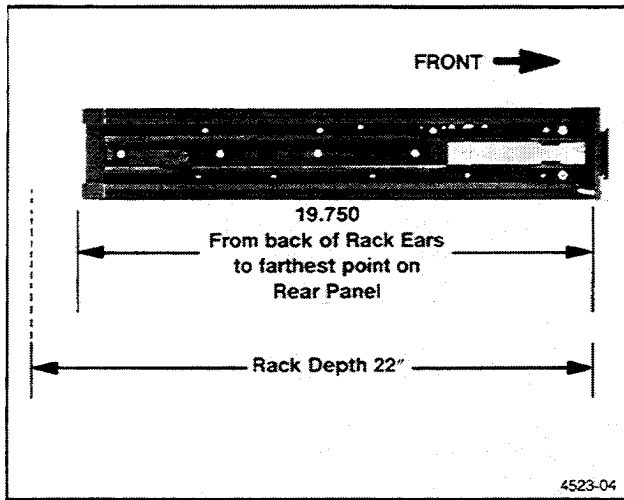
1910 Rackmounting Length and Clearance.
